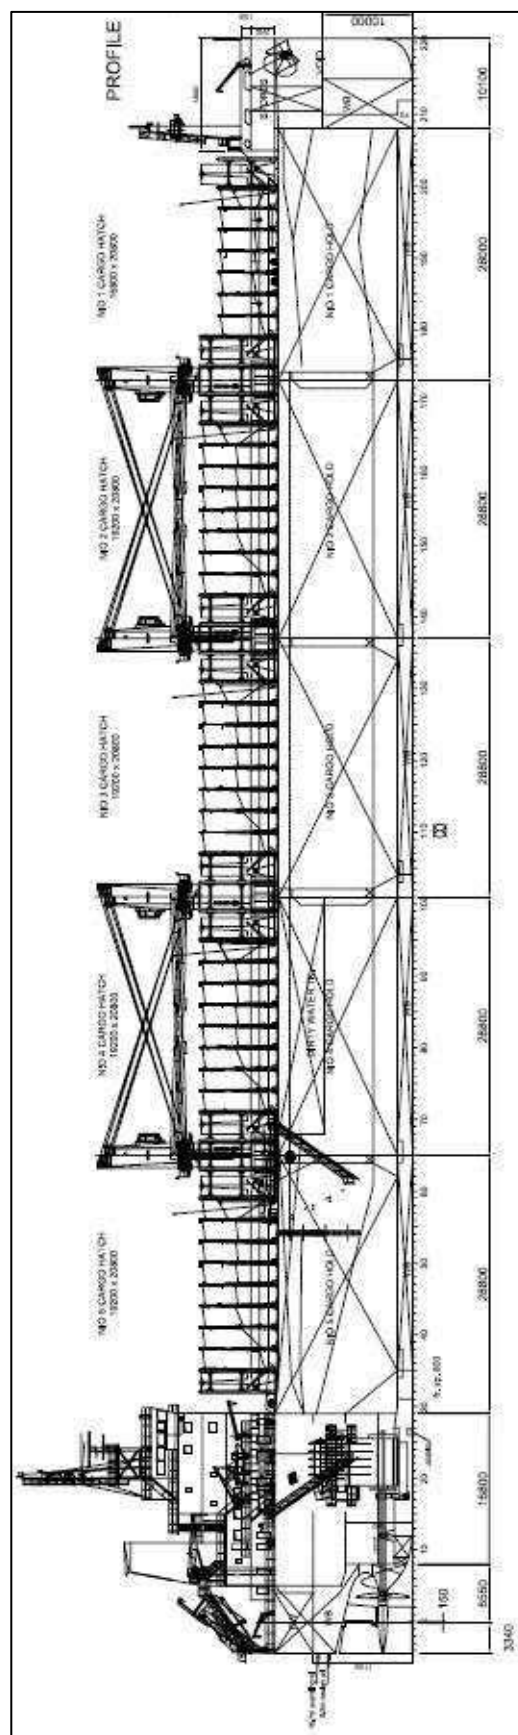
Extract of the General Arrangement Plan – *La Solognais* (Scale – 1:300)
